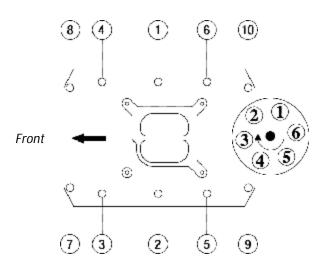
Intake Manifold Bolt Torque Sequence Torque Bolts to 25 ft/lbs. Firing Order: 1-6-5-4-3-2 Turn Distributor Counter-Clockwise to Advance Ignition Timing
